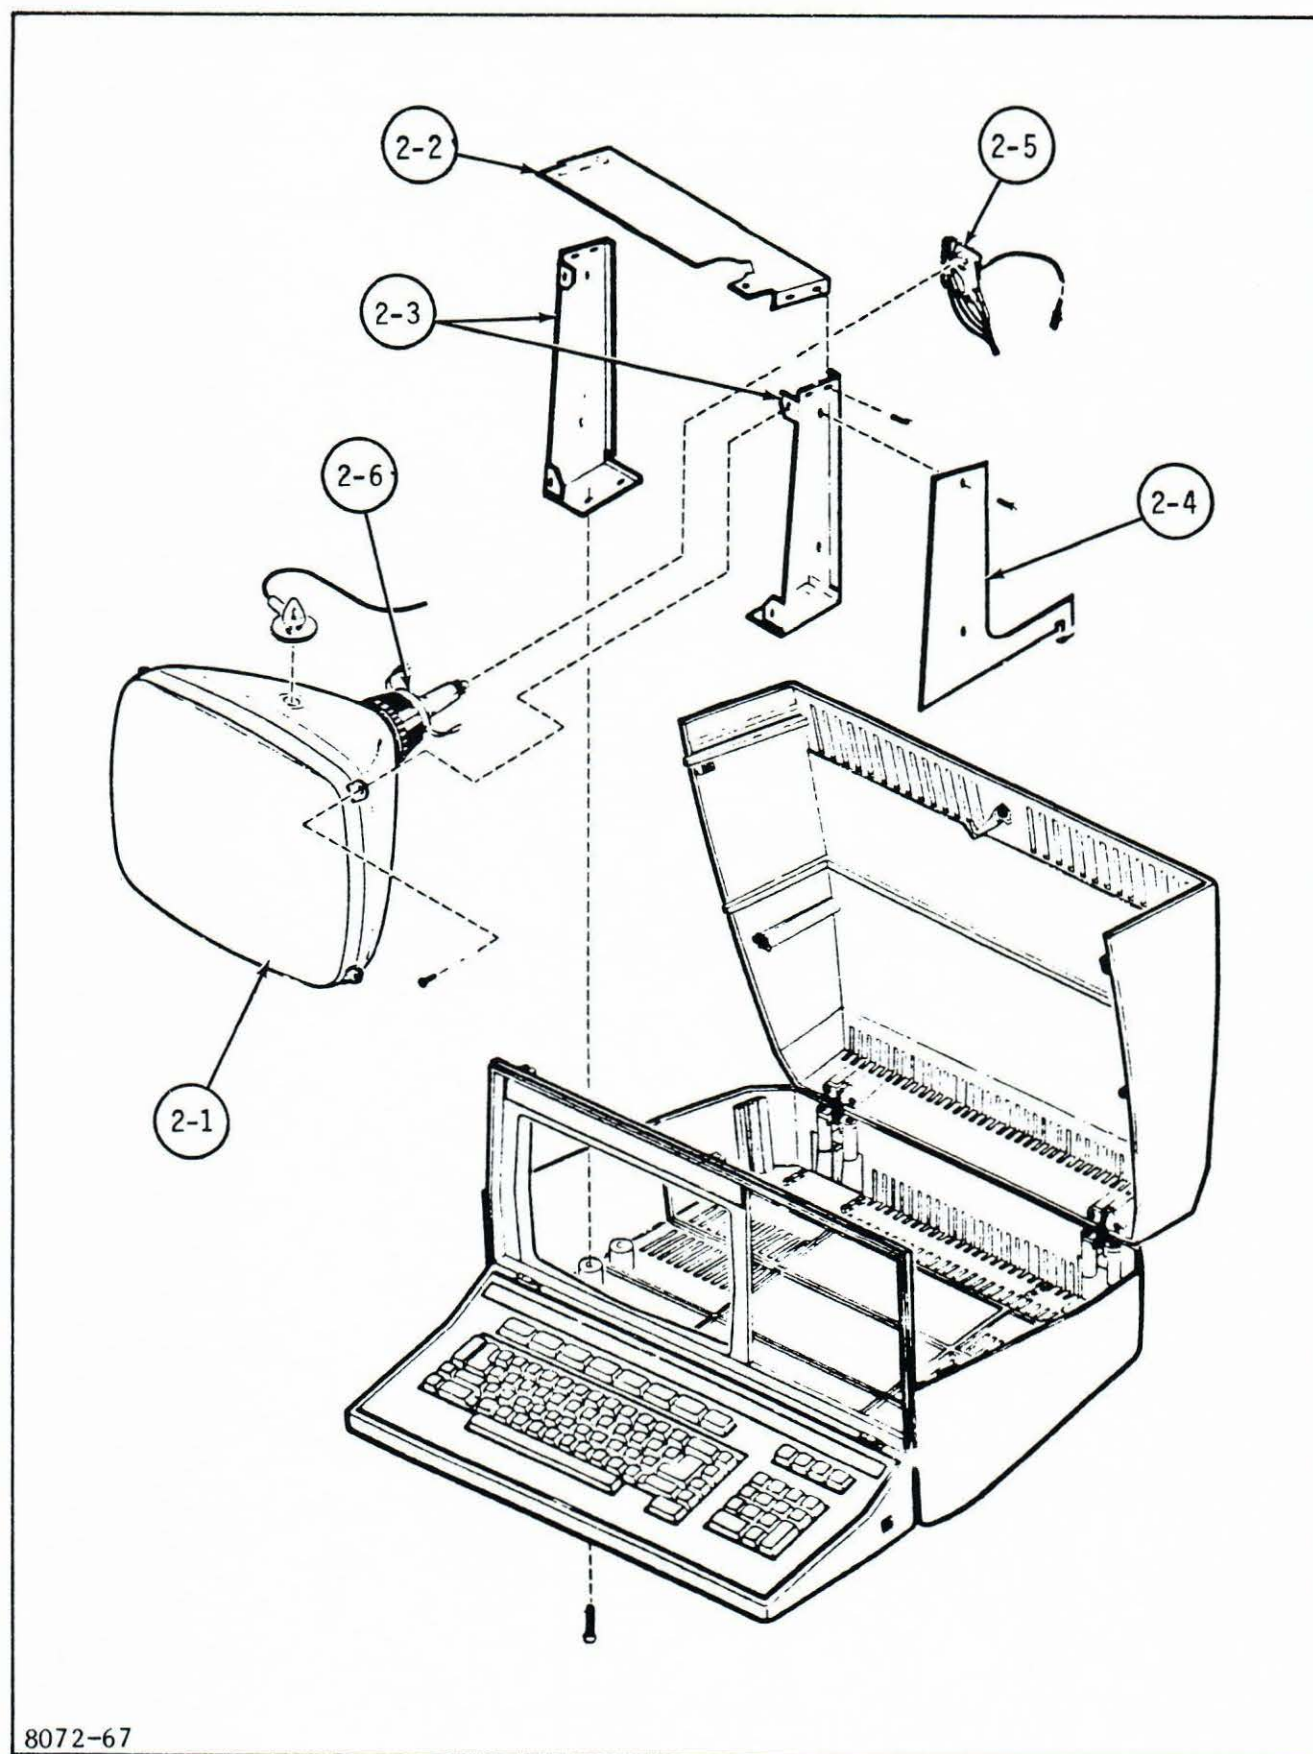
ODT - S/10 Keyboard and Cabinet Assembly
